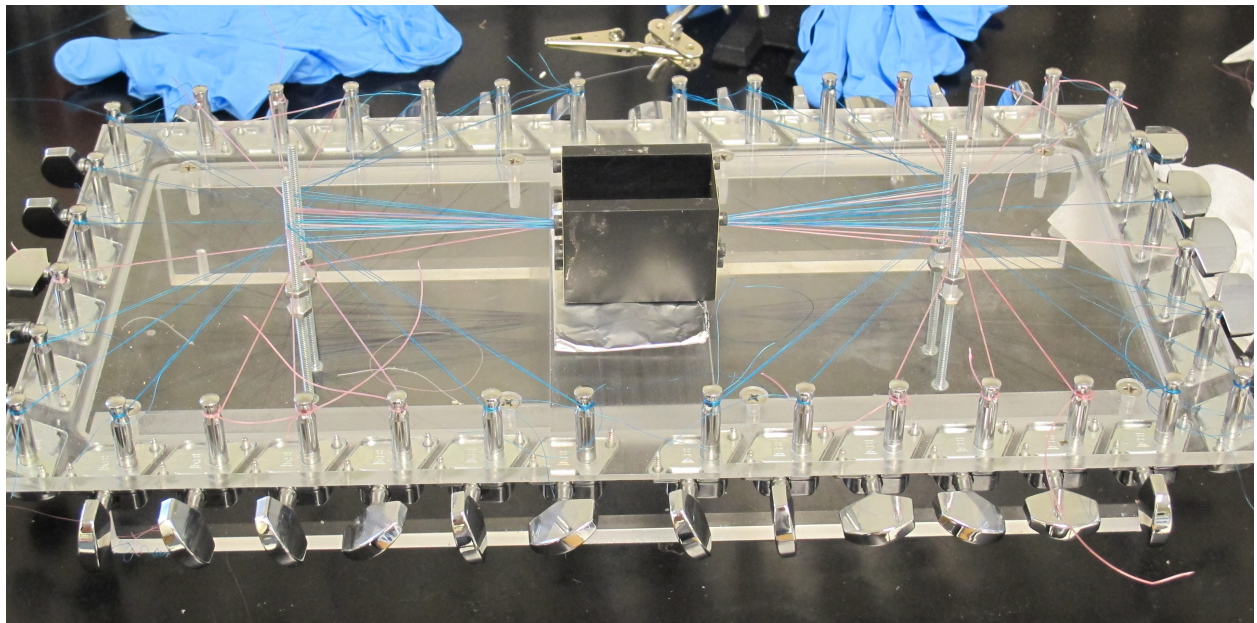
Assembled molding setup. Fibers are tensioned through the brass end caps using the tuning board. Metal rods in the board act as pulleys to help tuning pegs along the side of the board to tension the fibers.
